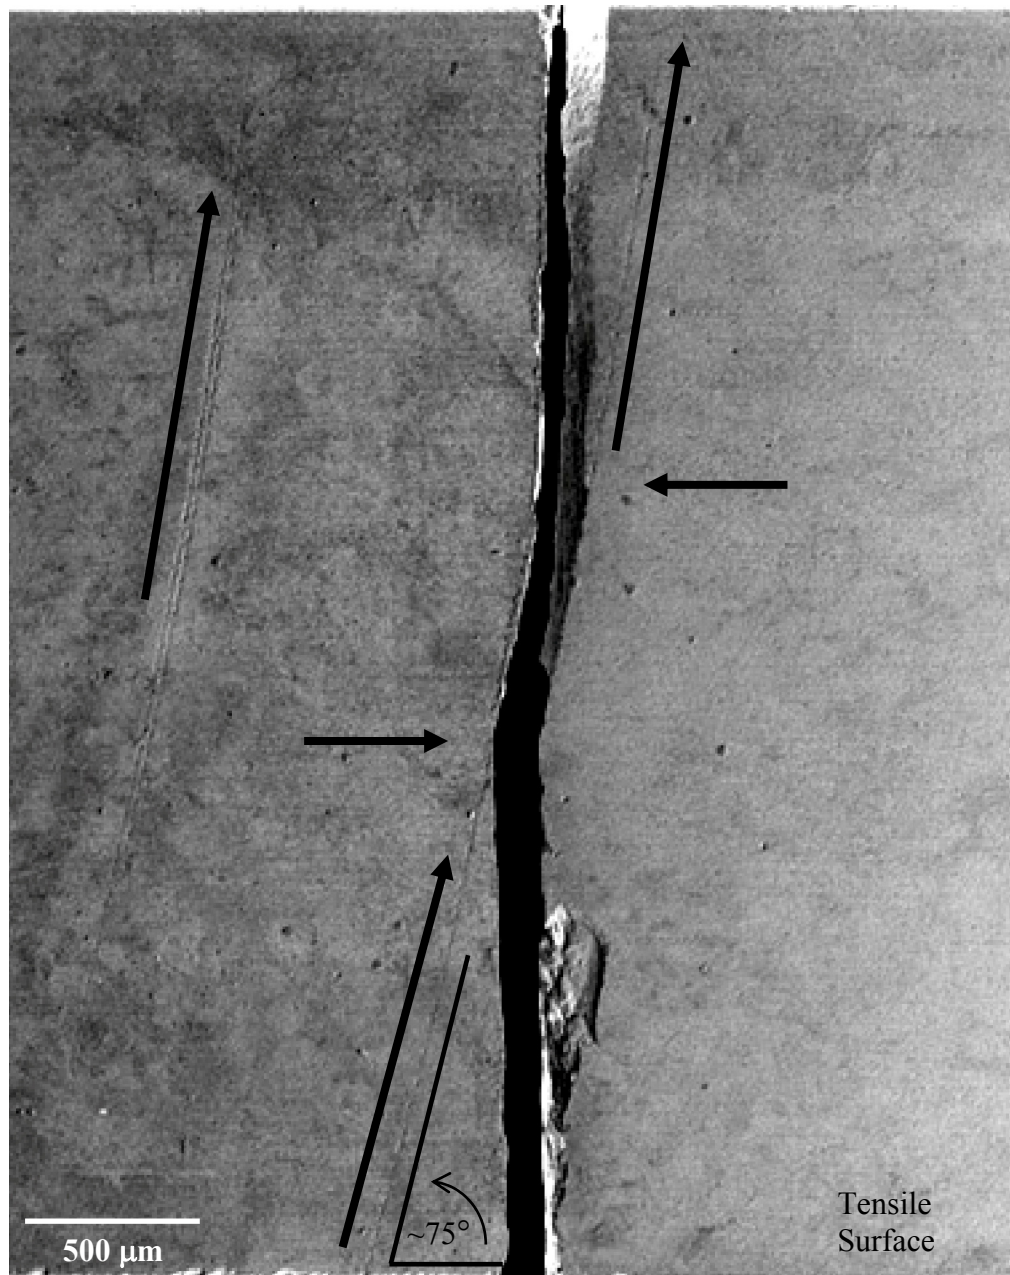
Bar B. Tensile surface of a low strength flexure bar ($\sigma_f = 238$ MPa). Machining scratches make an angle of 75° with the long axis of the bend bar, acting as a failure initiation point. Composite image. 185x magnification
